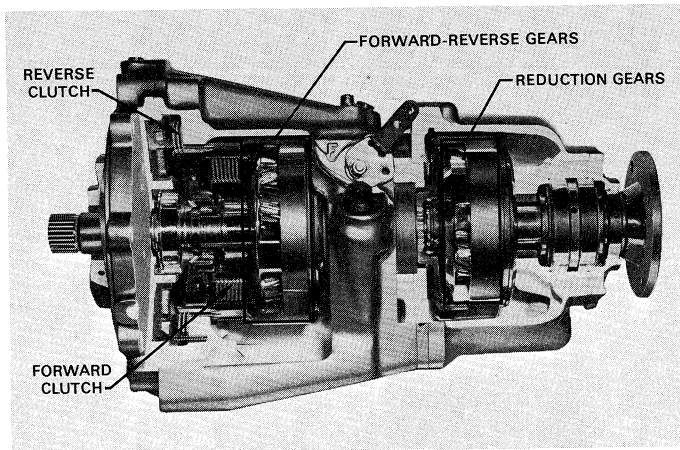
Courtesy Warner Gear/Warner-Motive.
